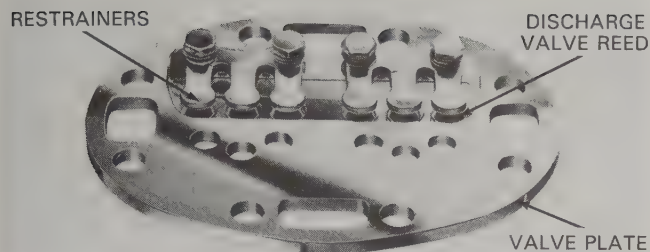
Valve plate with discharge valve reeds and restrainers. The actual valve reed is a thin metal plate held in place by the bolts and restrainers (the thicker metal, three-fingered pieces shown). The restrainers prevent excessive flexing and damage to the reed from liquid slugging. (Carrier)
